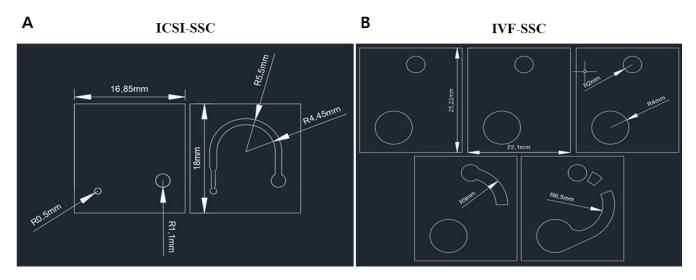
Cad designs for (A) ICSI-SSC and (B) IVF-SSC.
